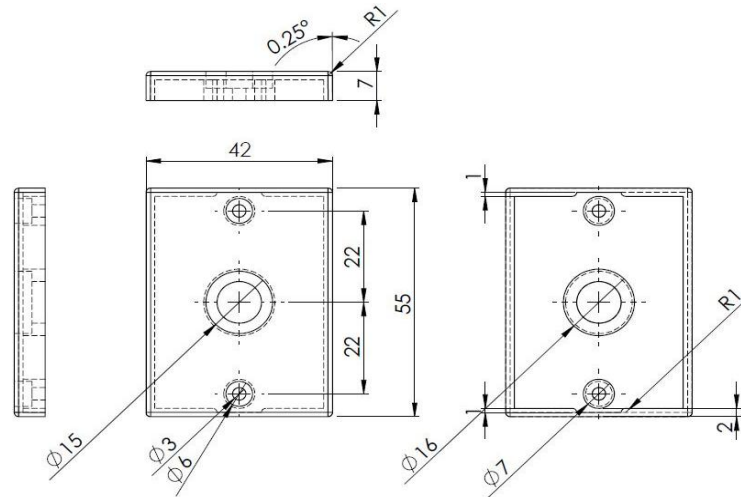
TWO-DIMENSIONAL DRAWING OF WORKPIECE PATTERN SHOWING ALL DIMENSIONS
